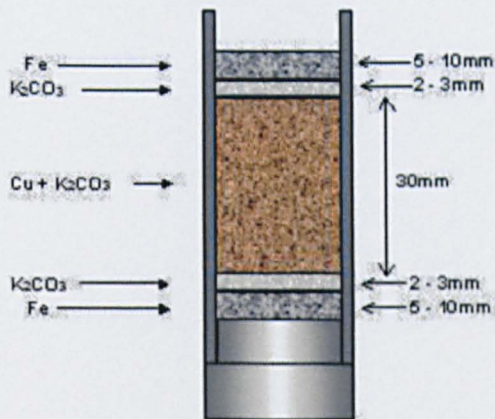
Schematic diagram of a perform/tube assembly ready for sintering.
